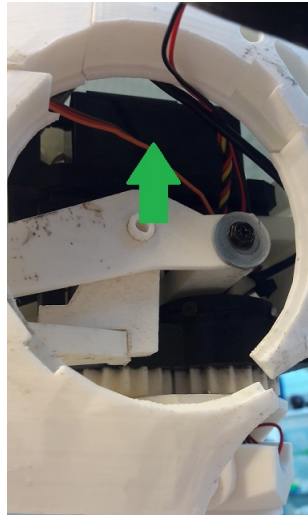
Newly installed servo for the head rotation (picture taken after the re-assembly)
